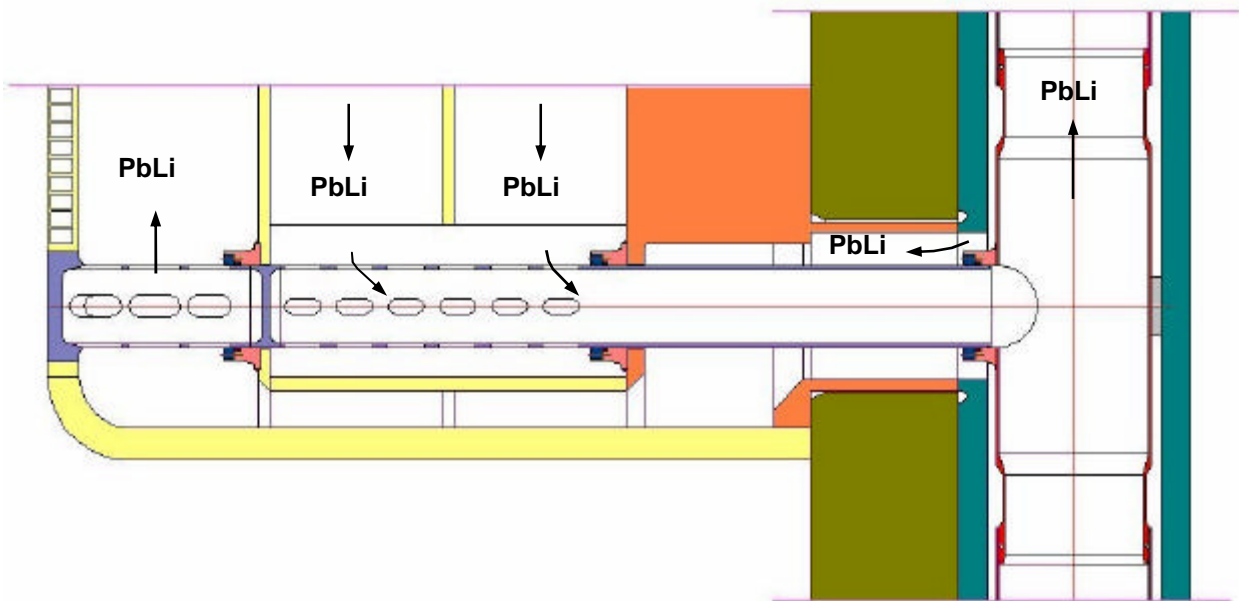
Dual-coolant blanket (model C), module attachment against torque.
